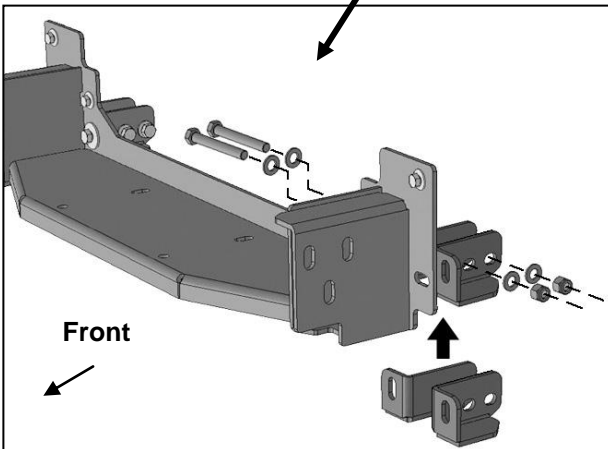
Reuse factory hex bolts to attach Winch Tray assembly to end of frame
